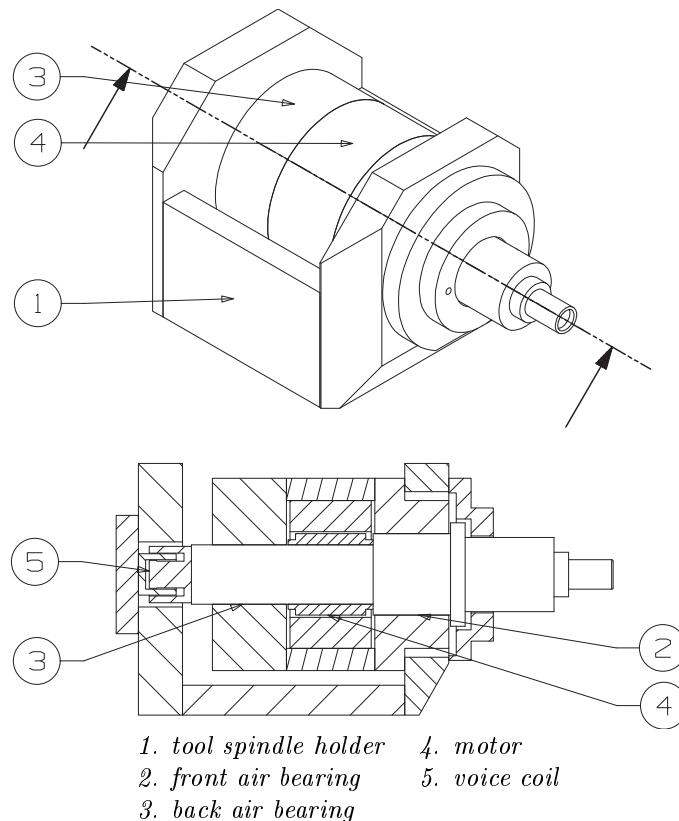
Alternative spindle design 1: aerostatic tool drive bearing
